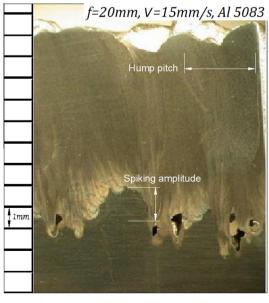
Porosity occurs in the welding of Al 5083 [9].
